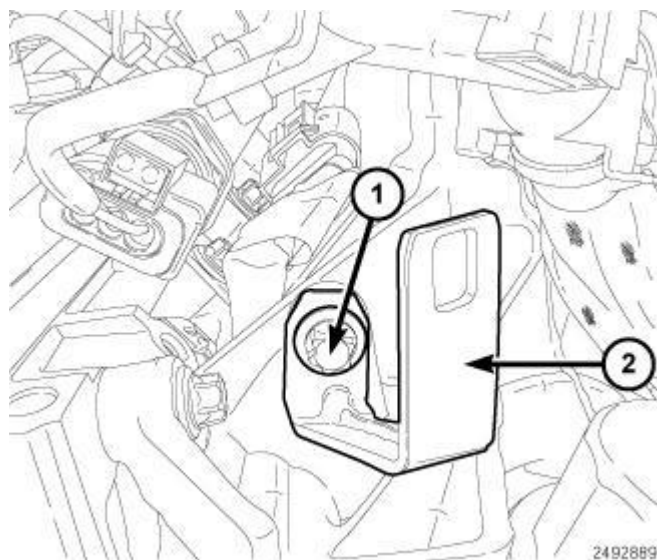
Intake Manifold Support Bracket & Bolts
